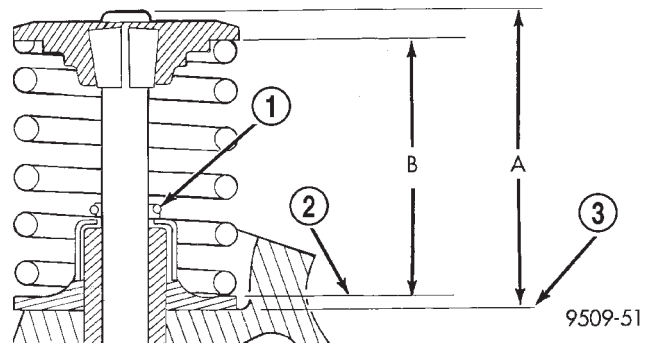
Spring Installed Height and Valve Tip to Spring Seat Dimensions
